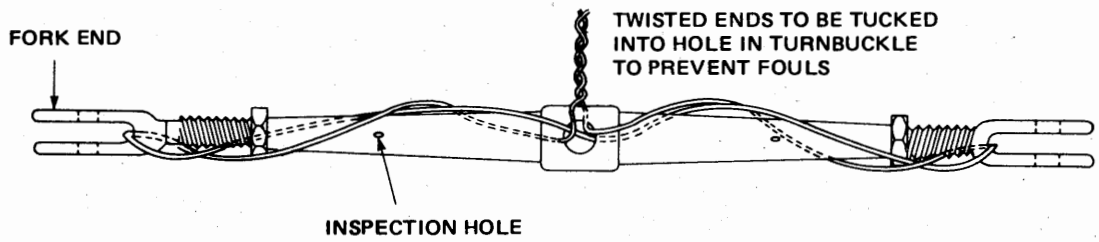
WIRE-LOCKING OF TURNBUCKLE WITH FORK END-FITTINGS
